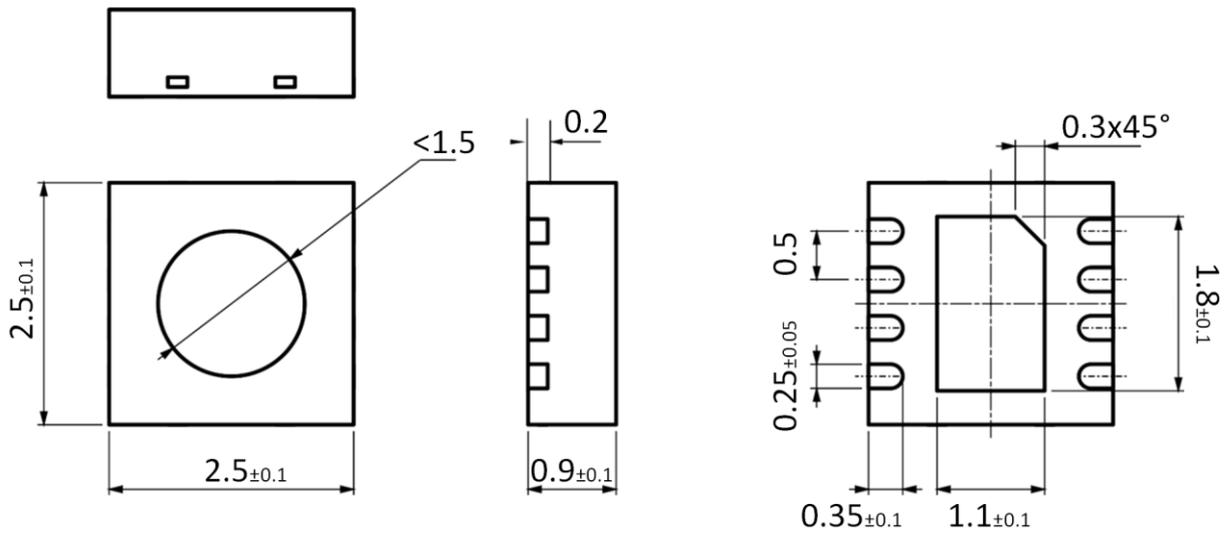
Dimensional drawing of the SHT3x including (units mm).
